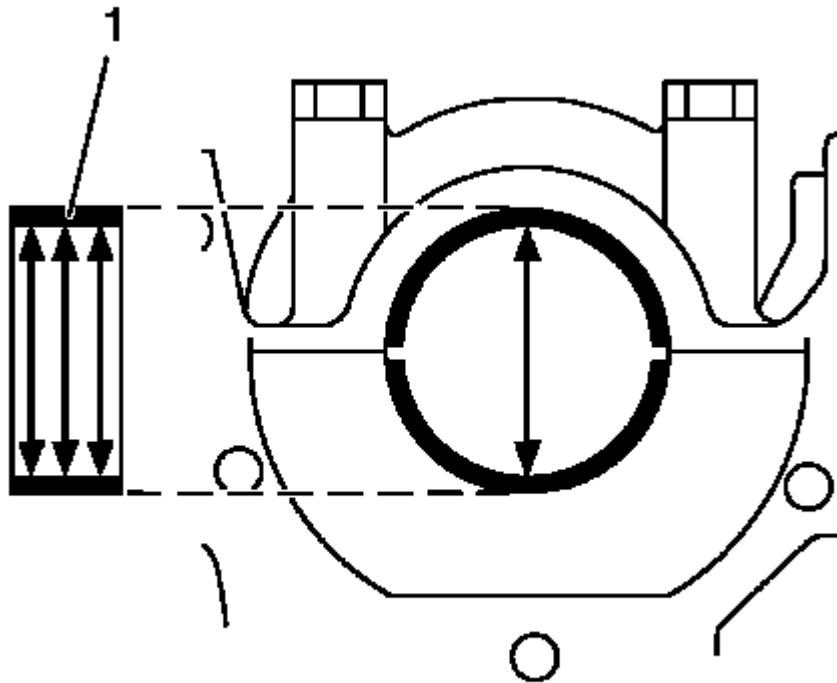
Crankshaft Bearing Diameter Measuring Points
